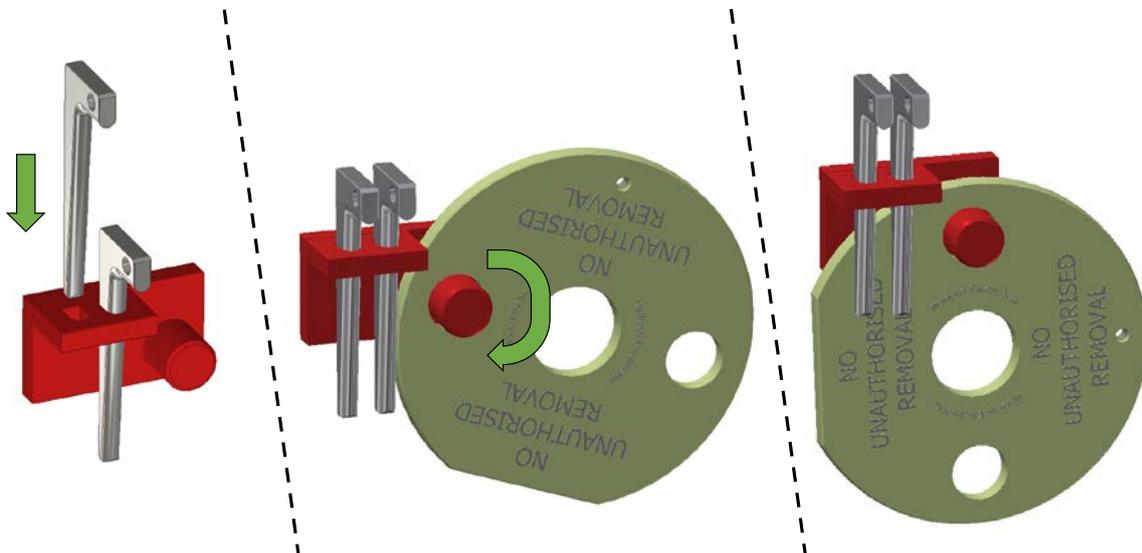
The CasTemp wedge and plate holder can be used on all types of plate and wedge.
